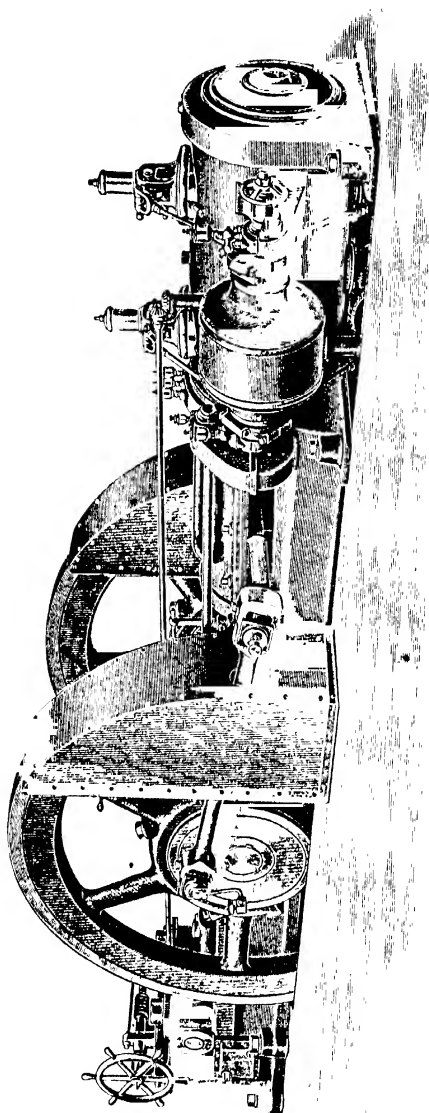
Buckau brquette press of heavy design with Proell patent positive valve gear (1906).
